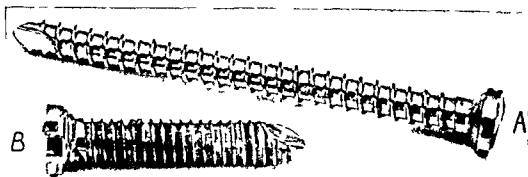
Screws from two different manufacturers used together in the same case. Note one screw (A) the longer is bright and shiny, presumably the cathode. At (B) the short screw corrosion is visible in the form of pitting all over the screw with actual destruction and cracking just beneath the head.
